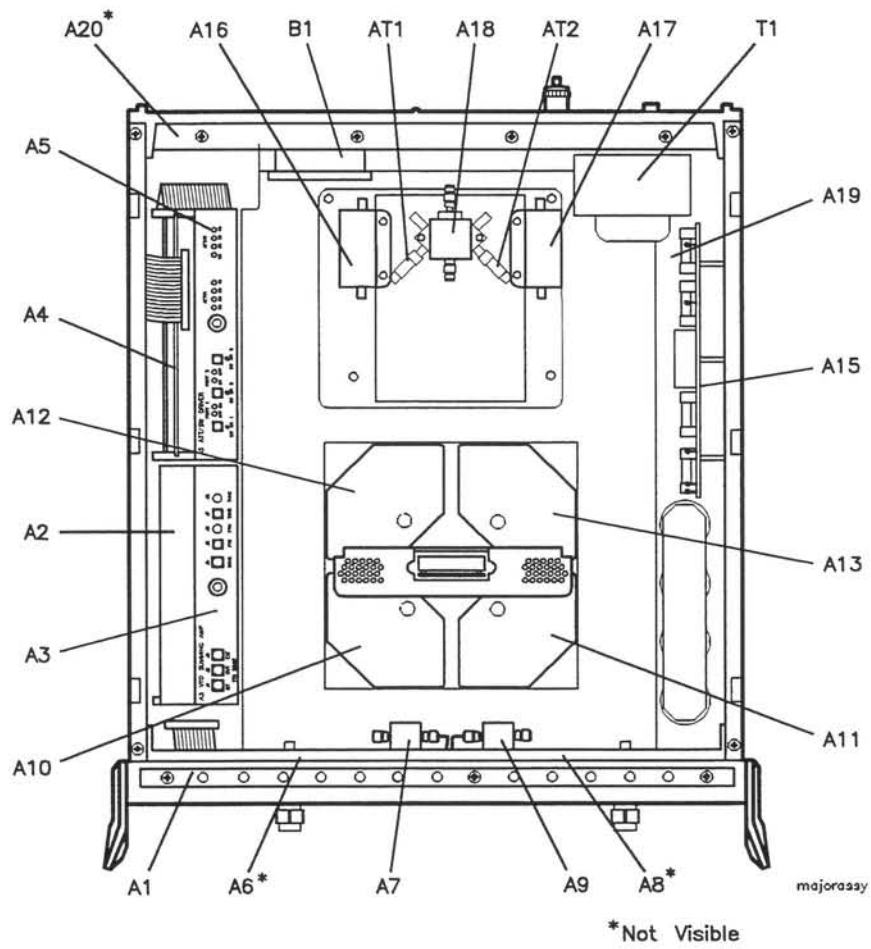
Major Assemblies of HP 8517B Standard Instrument
